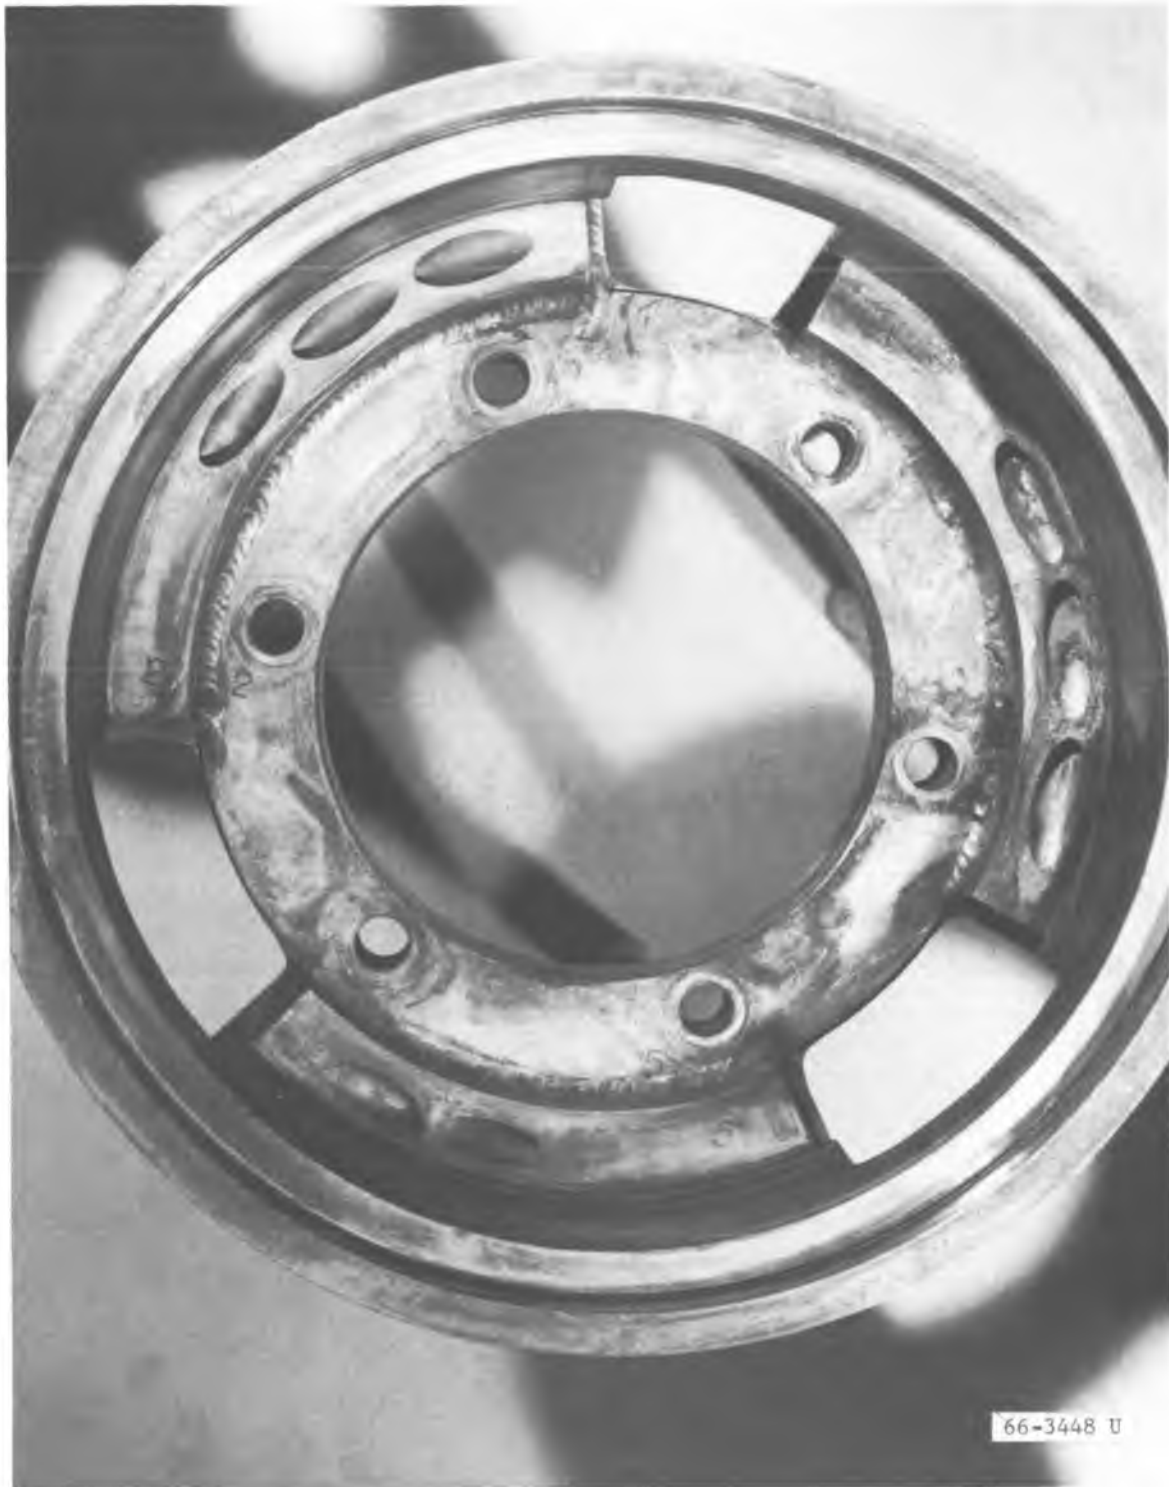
TEST TURBINE NOZZLE ASSEMBLY SHOWING THE THREE PARTIAL
